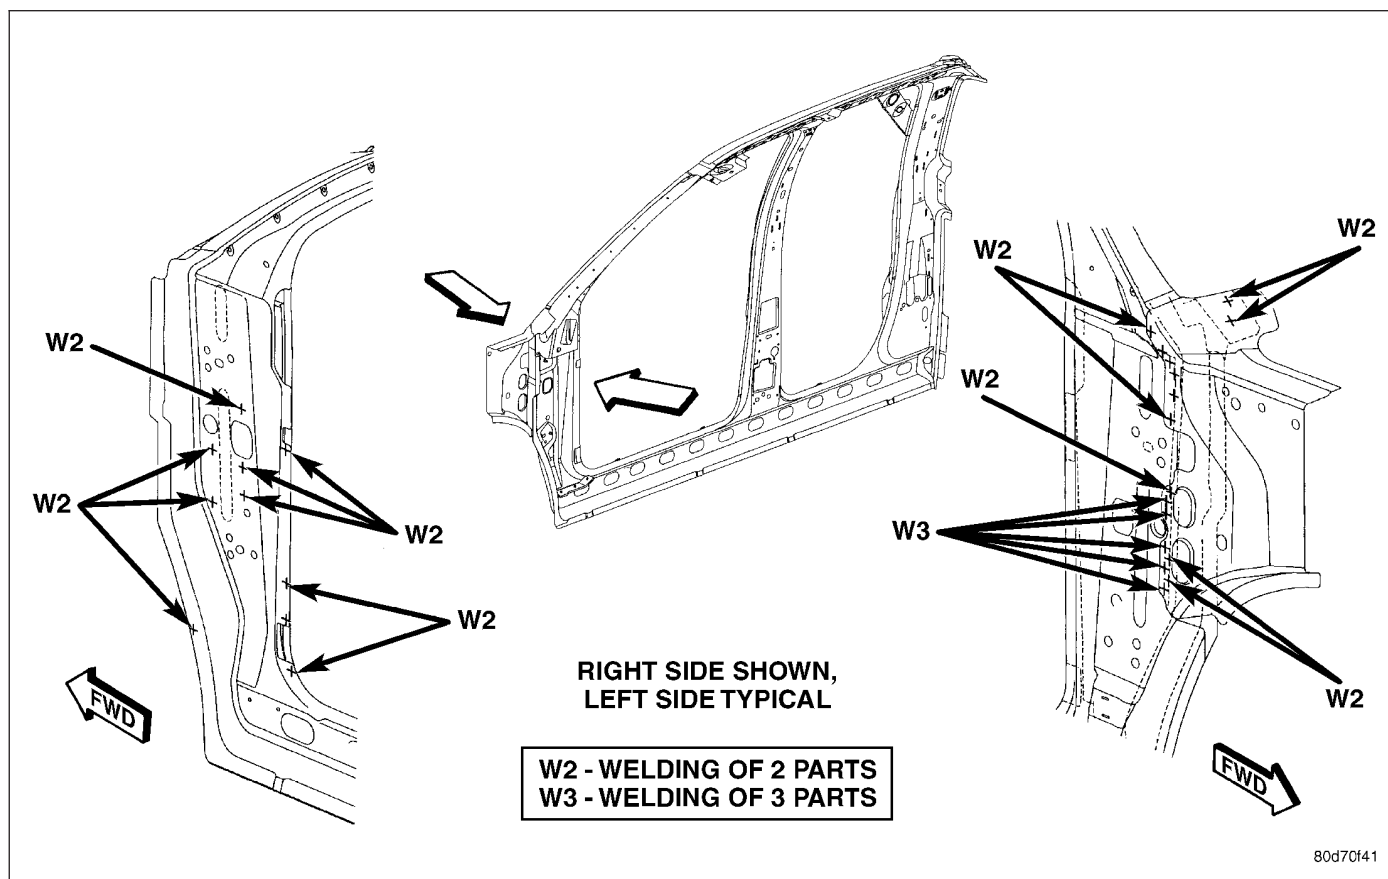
FRONT EXTENSION PLATE - QUAD CAB
